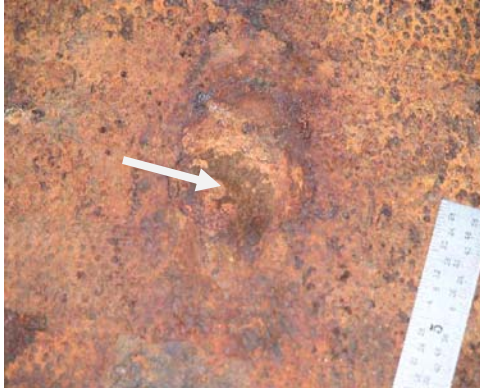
Appearance of pitting which occurred on the surface of a failed pipe.
